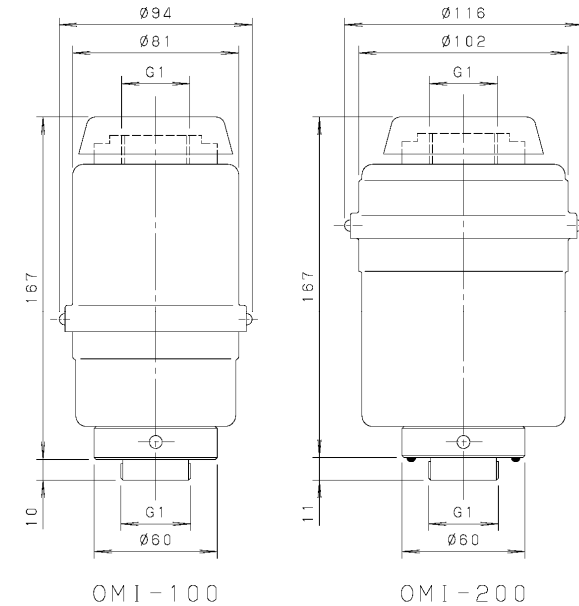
Dimensional drawing for OMI-100/OMI-200
